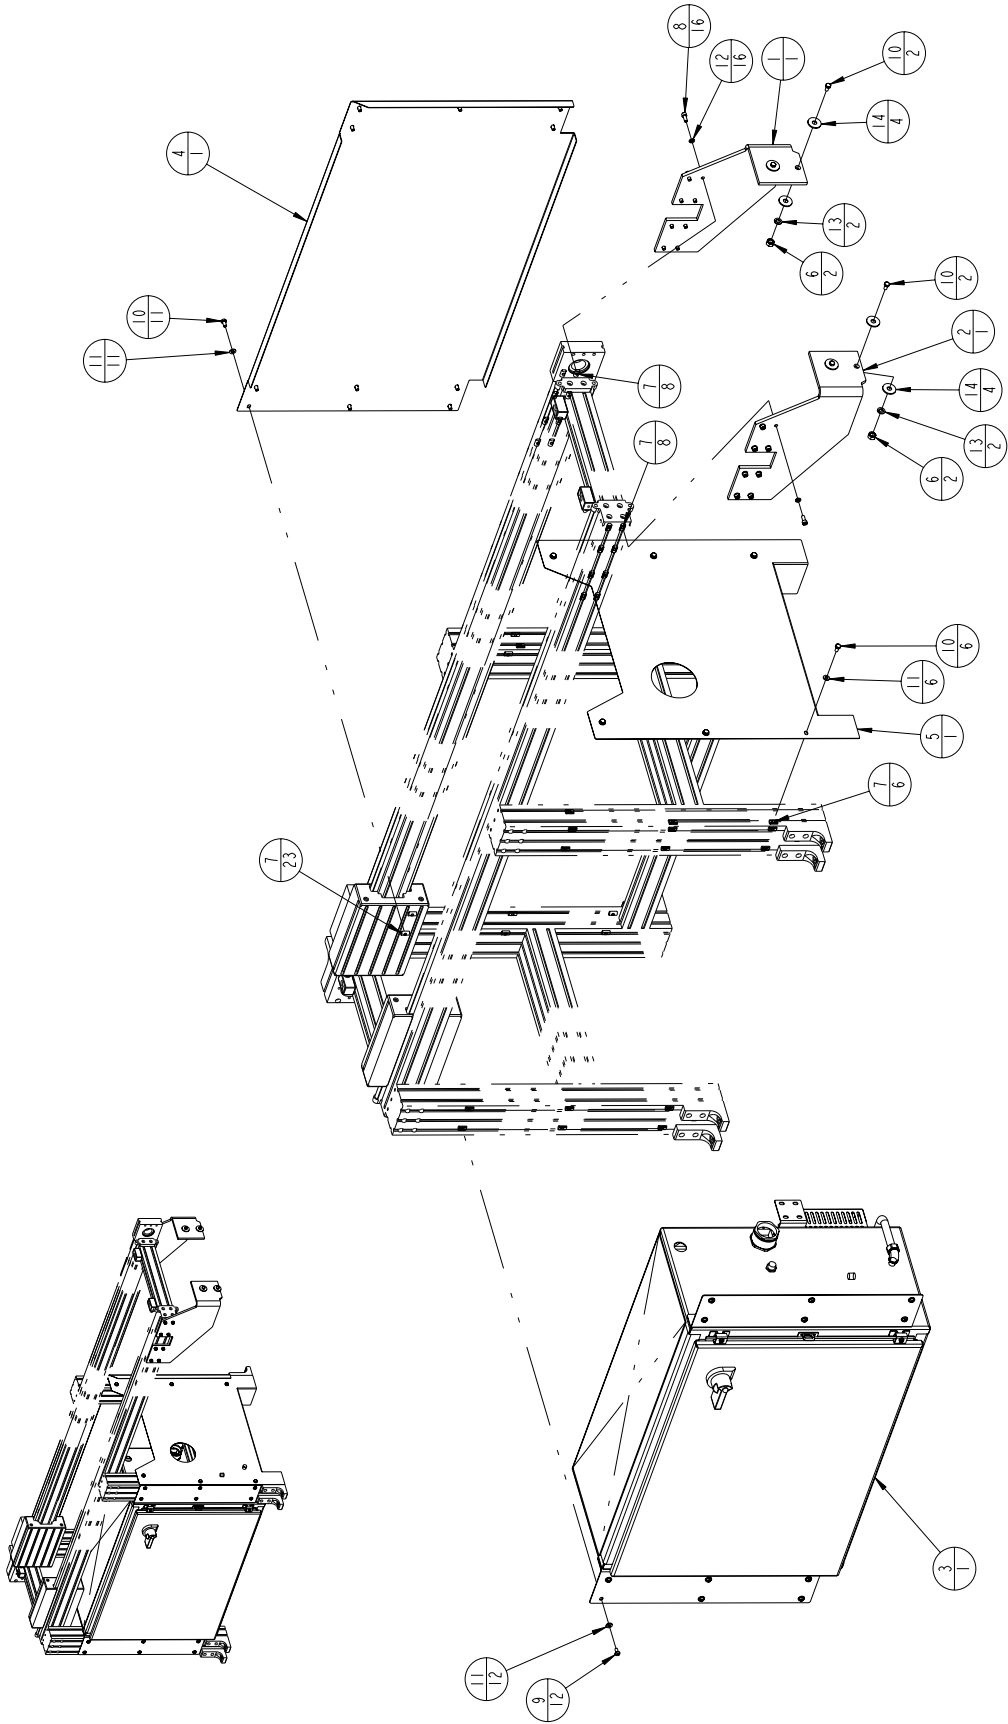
B – 2 METER CARRIAGE BASE ASSEMBLY (1 of 3)
